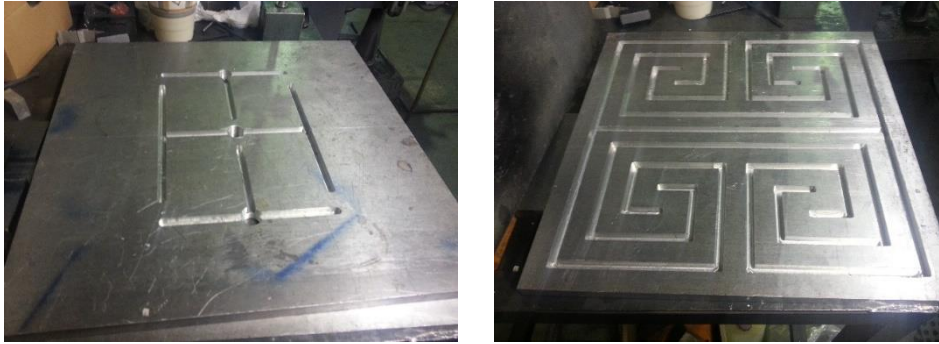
Bottom and top layer machined from a 12 mm aluminium sheet
